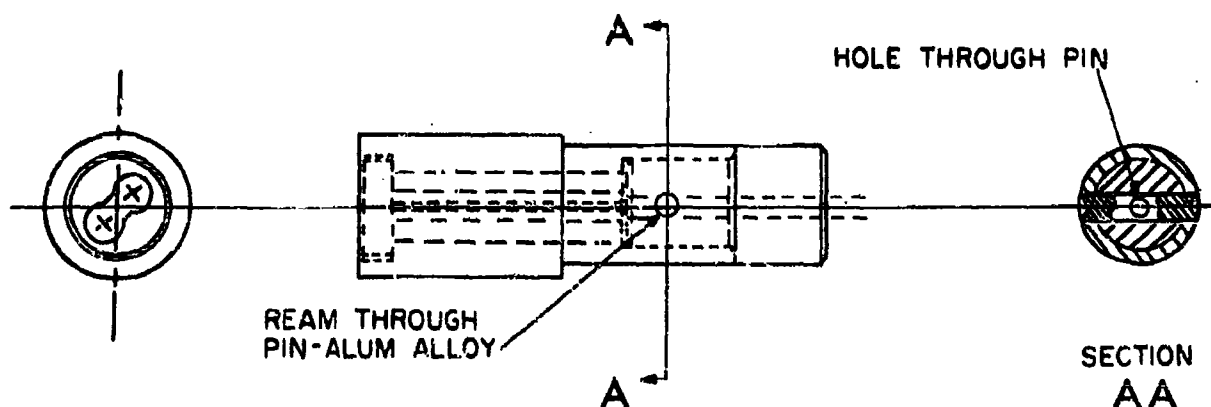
Tank Retaining Explosive Bolt Assembly
